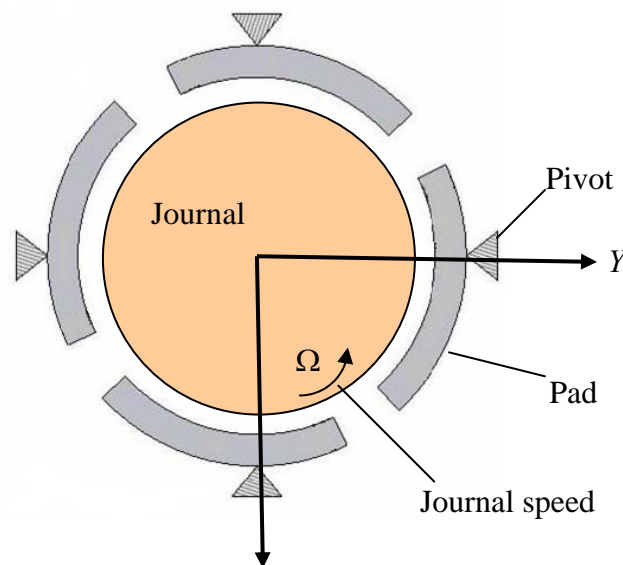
Schematic view of a four pad tilting pad bearing, Ref. [1]
